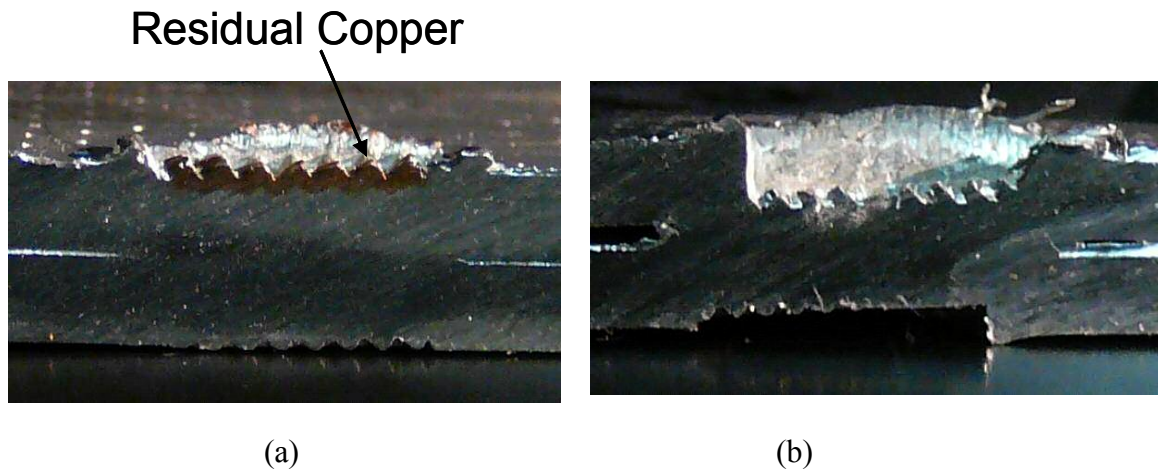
Photograph of cross section at weld centerline of a weld made with a copper buffer sheet (a) and without (b)
